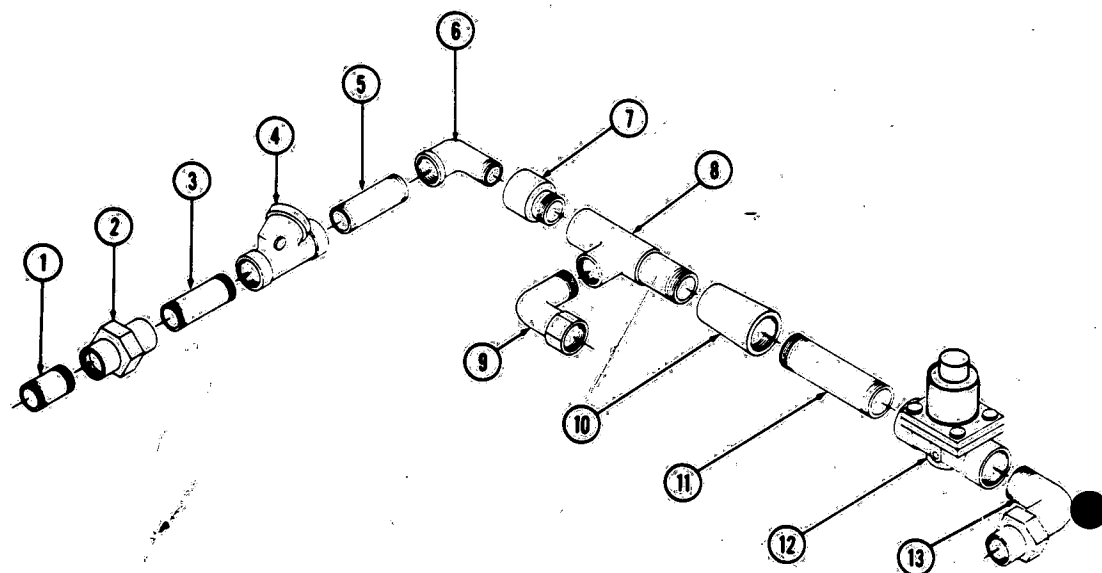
STEAM EJECTOR ASSEMBLY - Vacumatic
